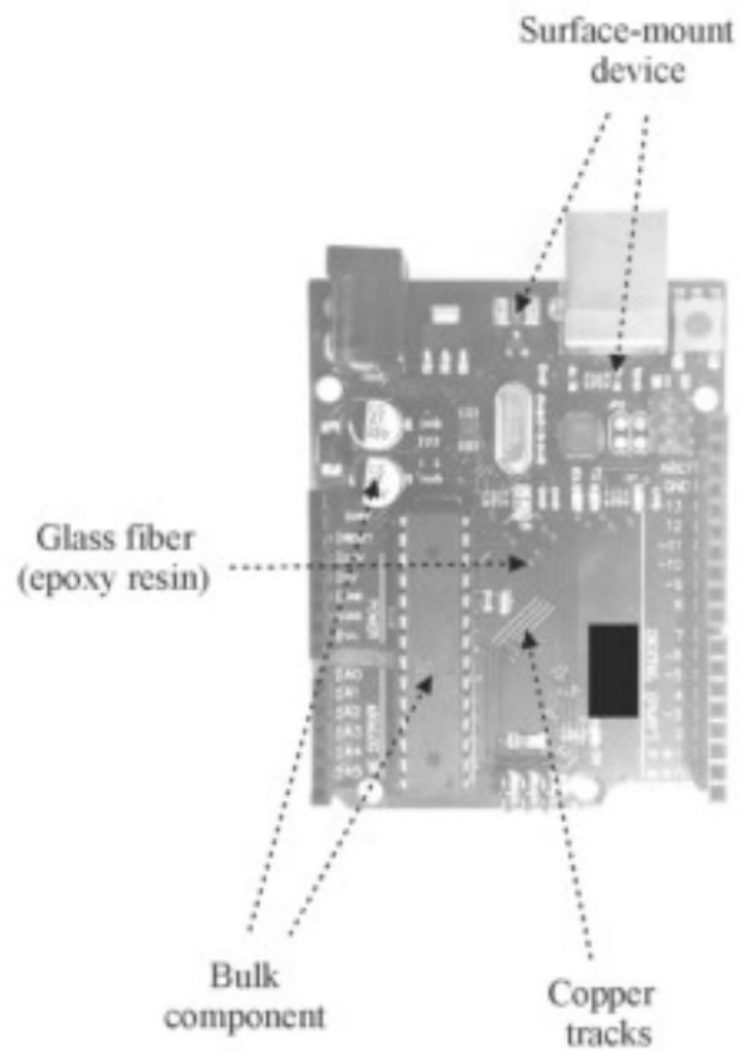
Materials included into a modern PCB where surface-mount devices might be a significant source of E-waste.
